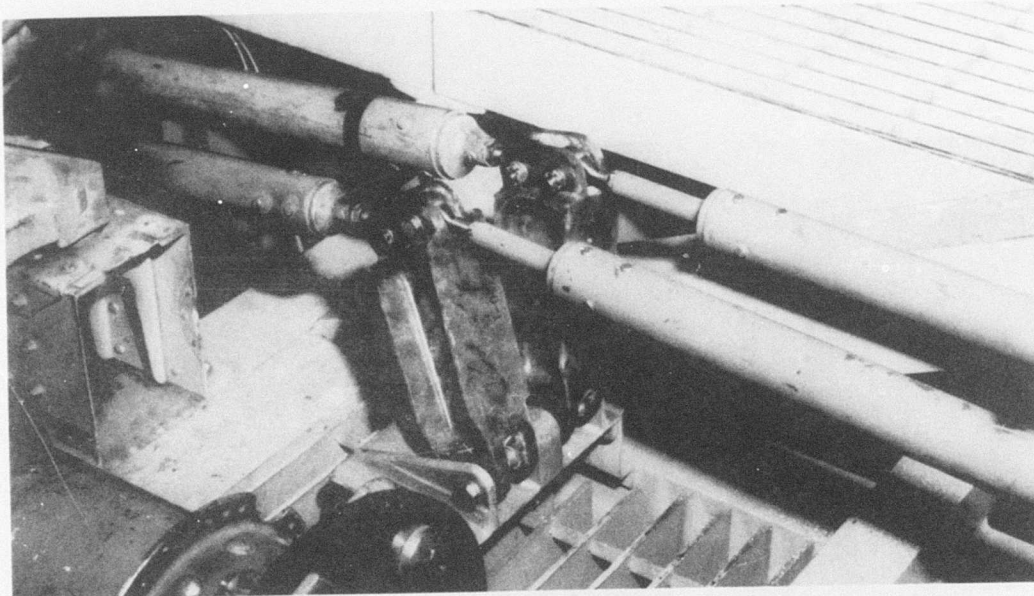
Two Molded Idler Bell Cranks Installed in CH-47C Training Unit.
